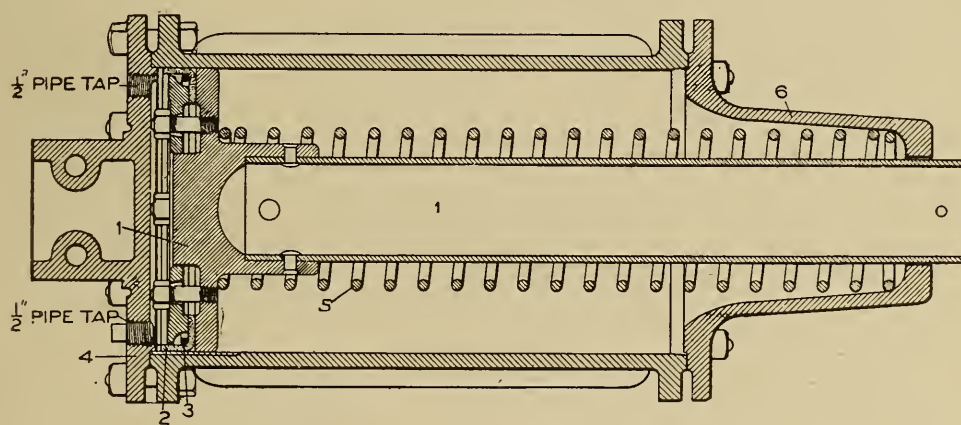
Brake-Cylinder of Hollow-Rod Type.
